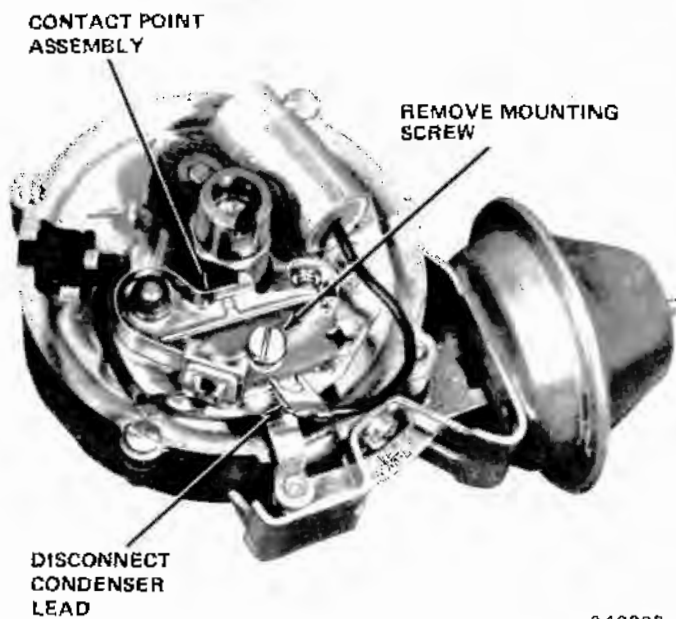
A-38 Contact Point Assembly Removal - Six-Cylinder
